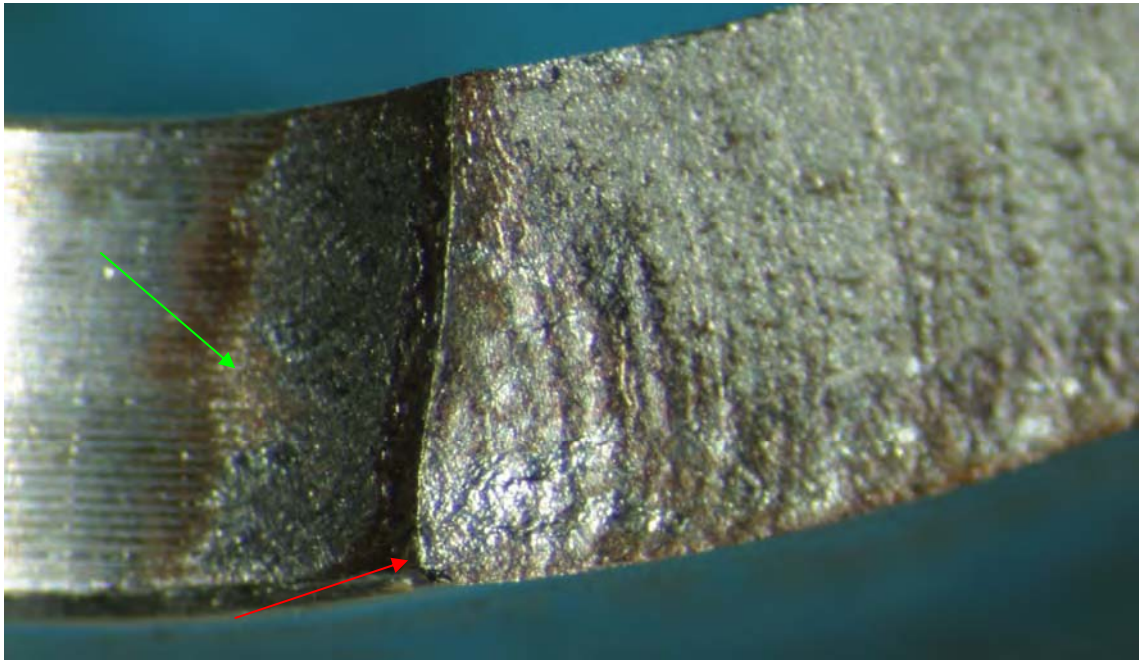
Low-power microscopic view of the fatigue crack origin (red arrow). Note the associated fretting damage on the bore surfaces of the bolt hole (green arrow).
